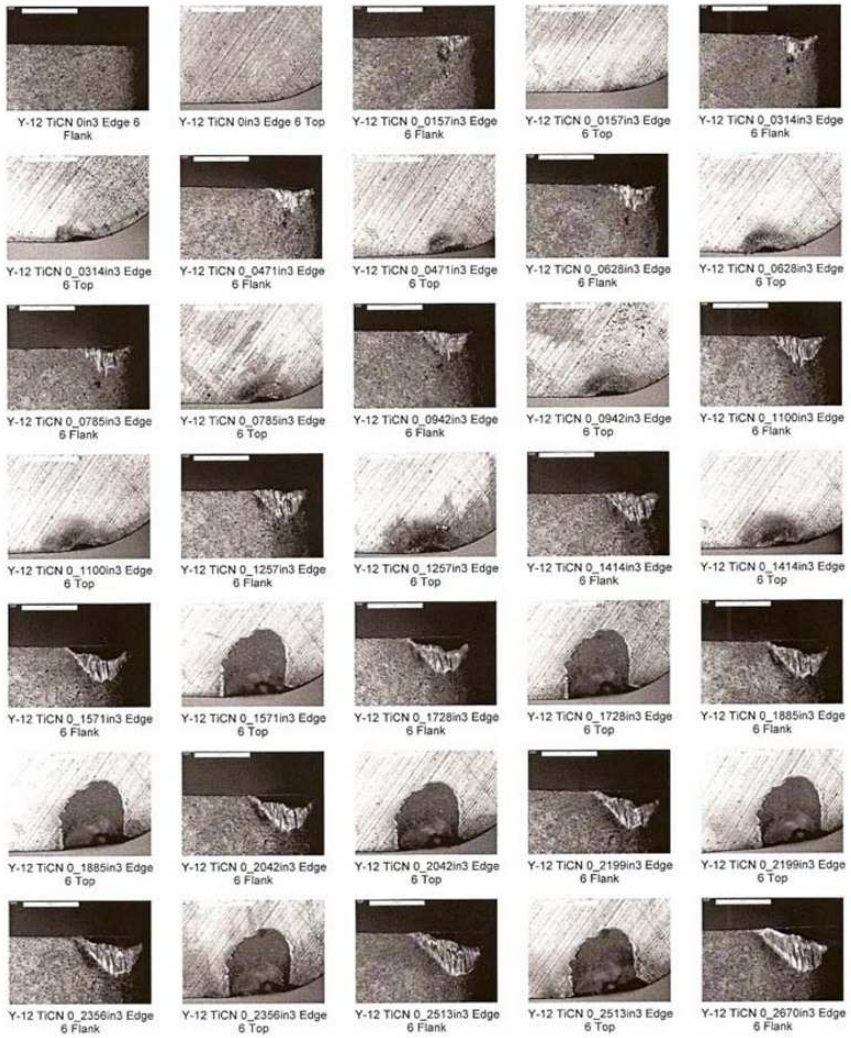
TiCN Tool Cutting Edge 6 machined at 121 RPM. 0 – 0.2513 in³ of workpiece removed
